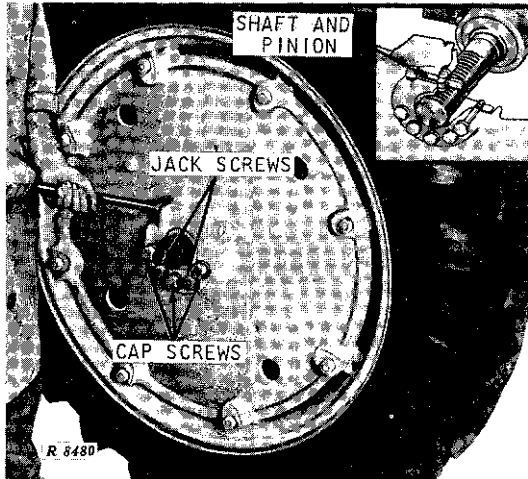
Rear Wheel Adjusting Shaft and Pinion
